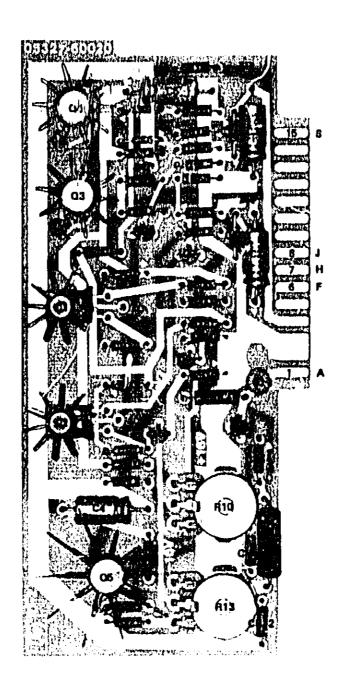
A15 Regulator Board Assembly 05327-60020 Series 1312A or 1428A Component Locator
